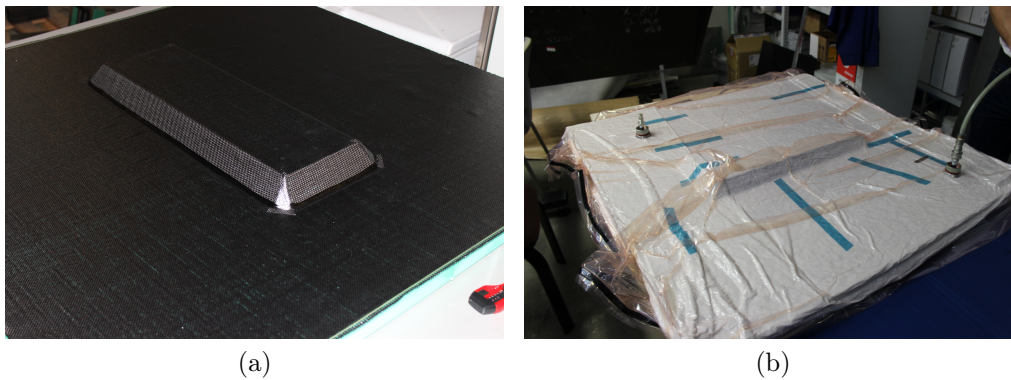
a) Finished prepreg layup before vacuum bagging. b) Vacuum bagged specimen before curing in the autoclave.
